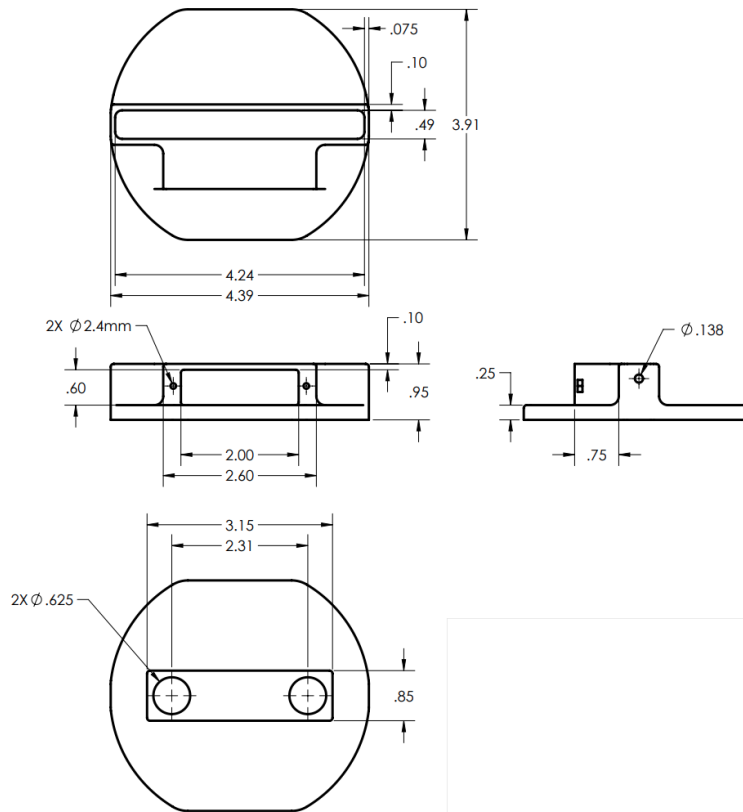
Bottom Bulkhead Dimension Drawing (in.)
